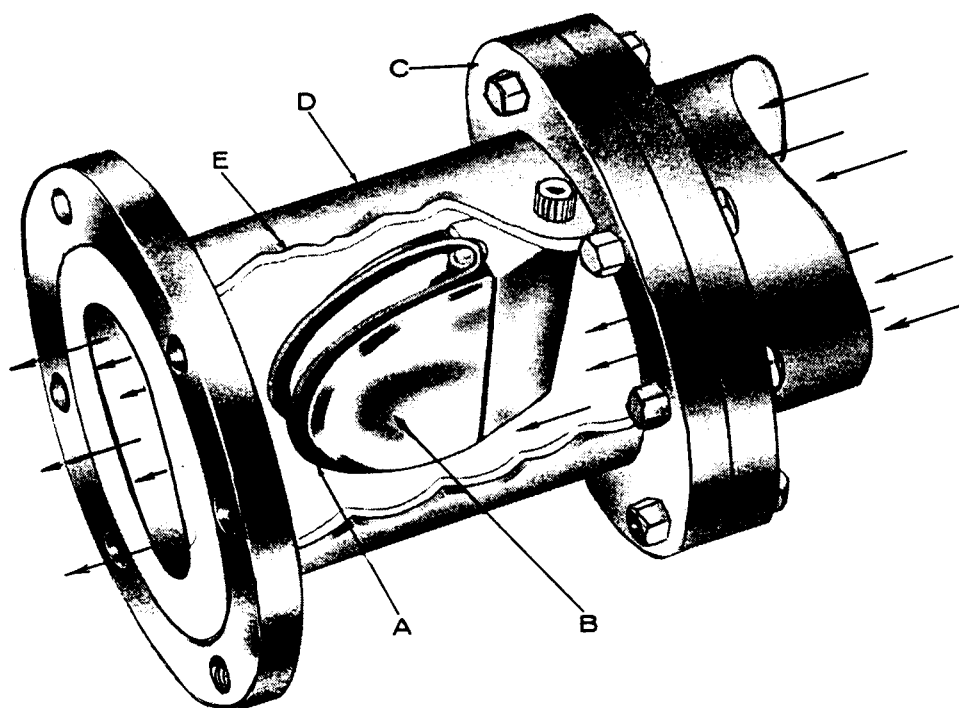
Lined butterfly check valve. A. Sealing member as required, B. internals to match liner, C. ASA flanges, D. steel or iron body, E. liner.
